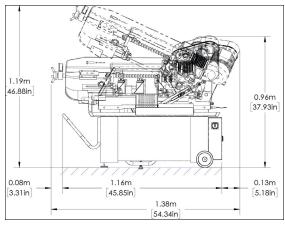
Dimensions of the machine itself, as viewed from the front.
